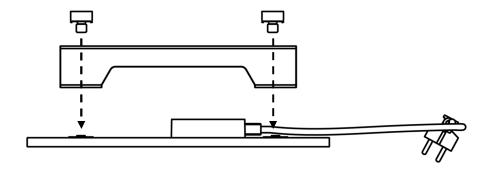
Attaching brackets (AGH0011S, AGH0012S)
